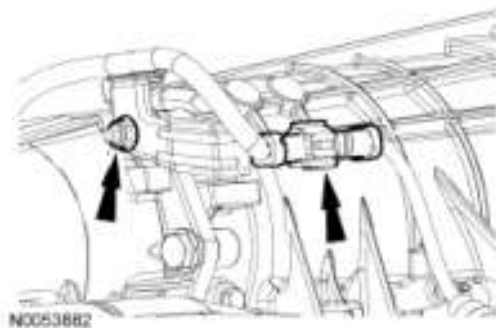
Locating Catalyst Monitor Sensor Electrical Connector
